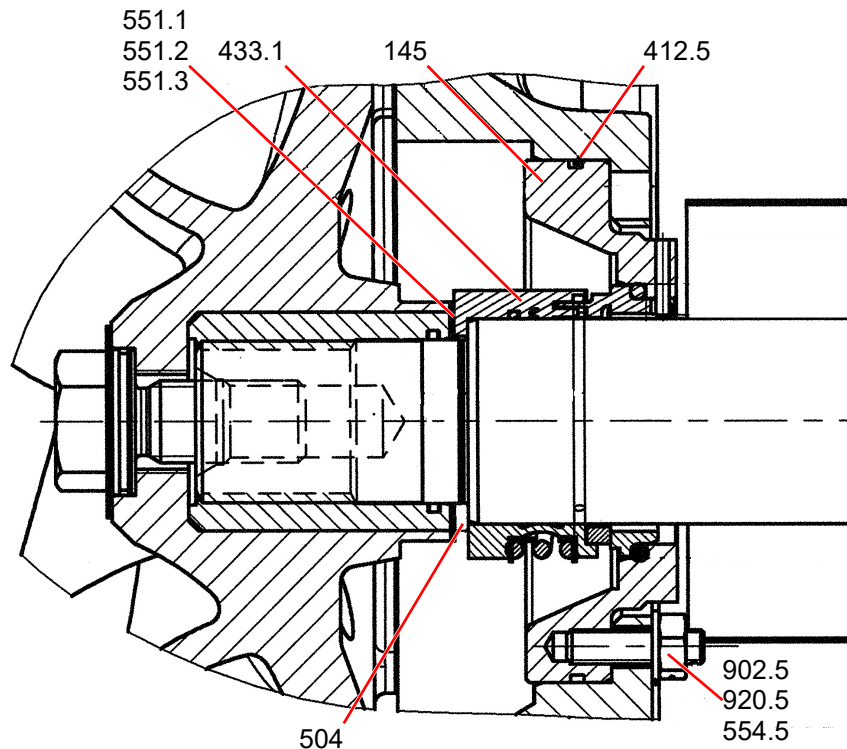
Mechanical seal – single-action (BS42 – BS100)
